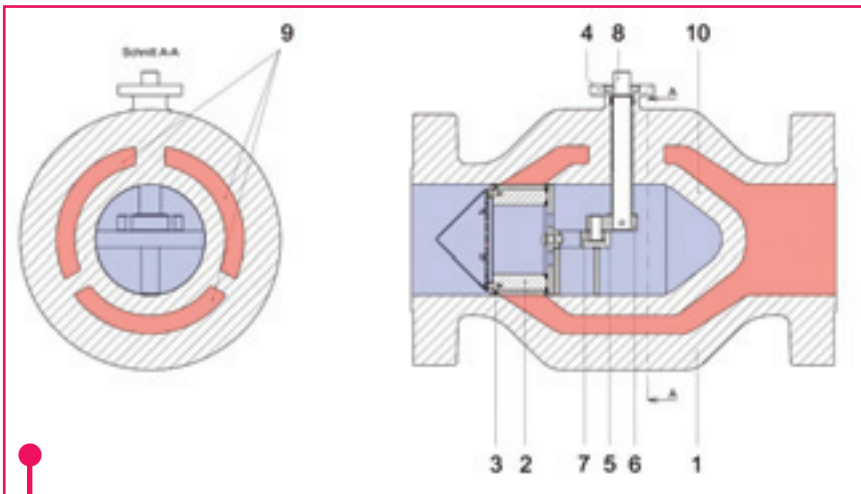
Cross section of KLINGER axial flow valve in closed position
